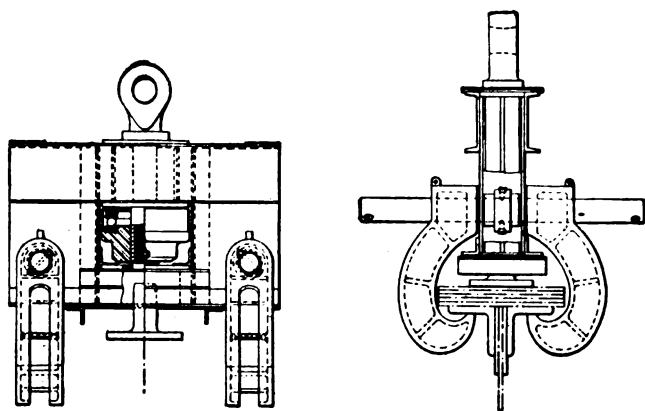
LIFTING CONNECTION FOR QUEBEC BRIDGE FLOOR-BEAMS
